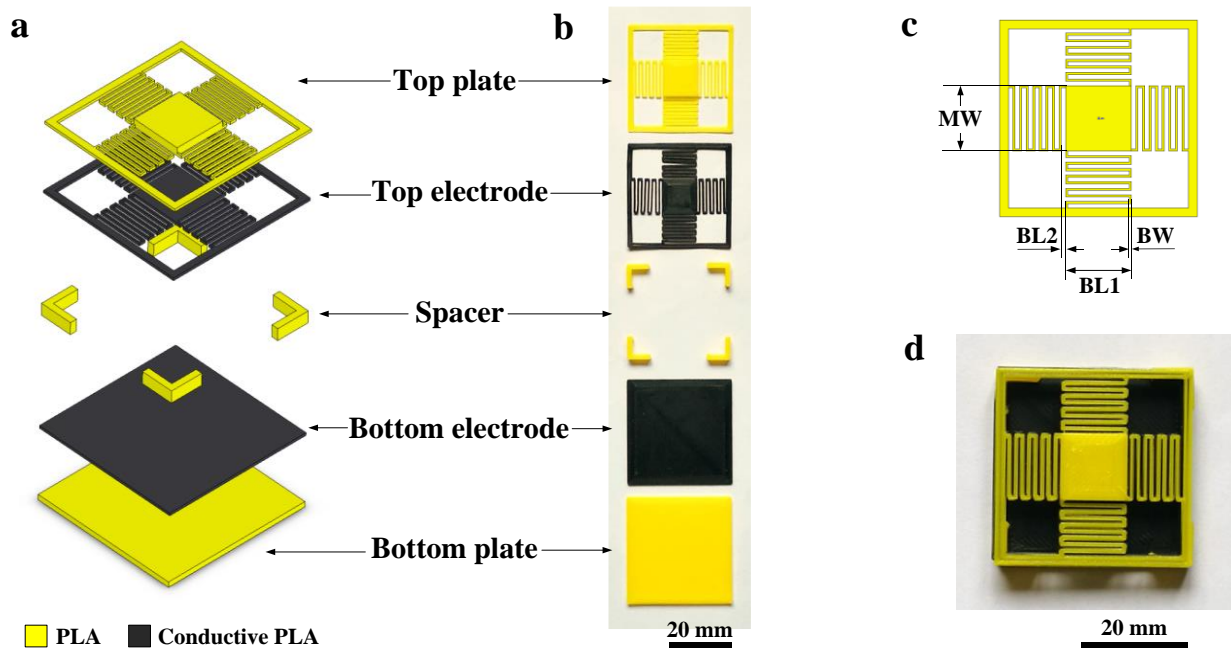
Schematic diagrams and photographs of a capacitive force sensor fabricated using a traditional multi-step printing method. (a) Exploded view of the functional layers. (b) Photograph of the 3D printed components of the force sensor. (c) Top view of the beam-plate structure. (d) Photograph of the 3D printed force sensor after assembling.
